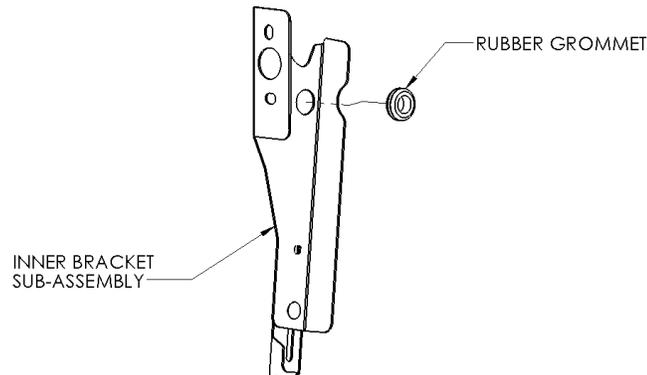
Inner bracket sub-assembly, driver side shown
